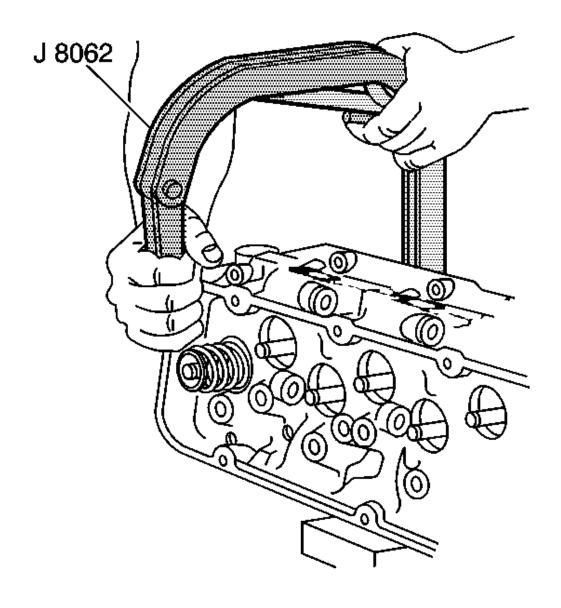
Compressing Valve Springs Using J 8062 Courtesy of GENERAL MOTORS CORP.
